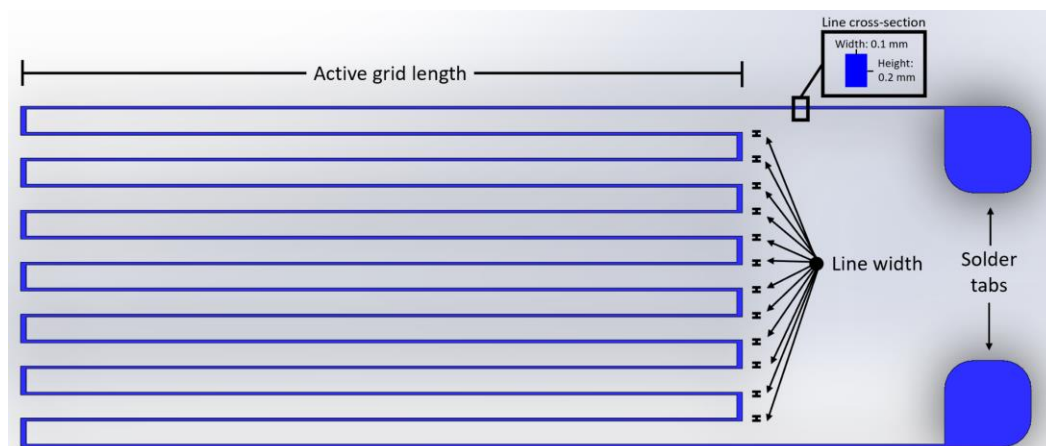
CAD image produced via SolidWorks of uniaxial strain gauge to be printed using conductive DIW.
